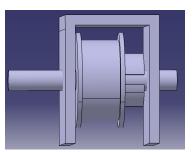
Mounting point for the other wheel / Front view mounting point
